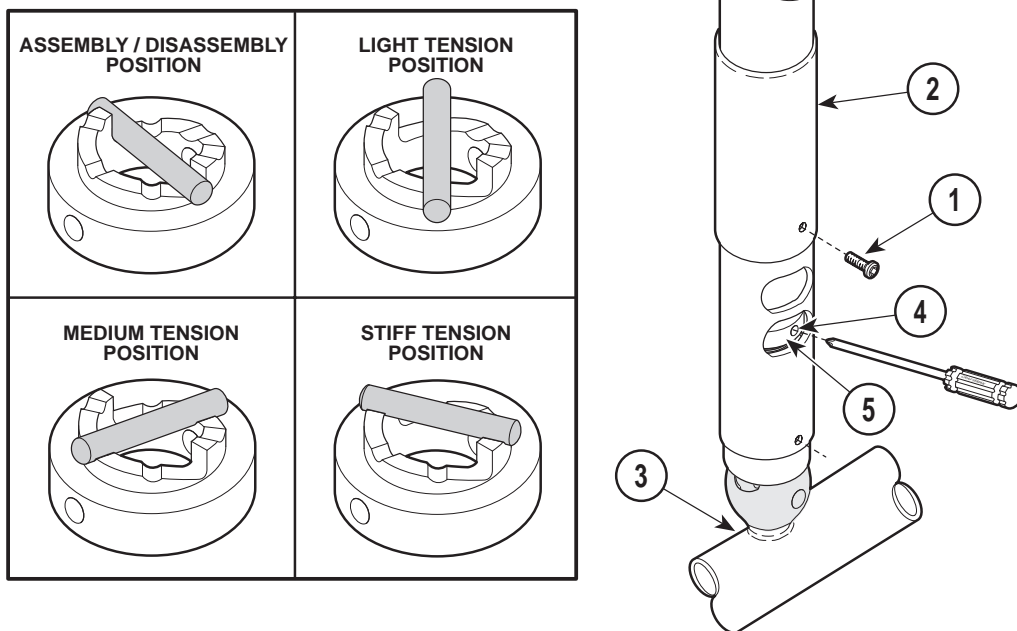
BALL PIVOT TENSION ADJUSTMENT
